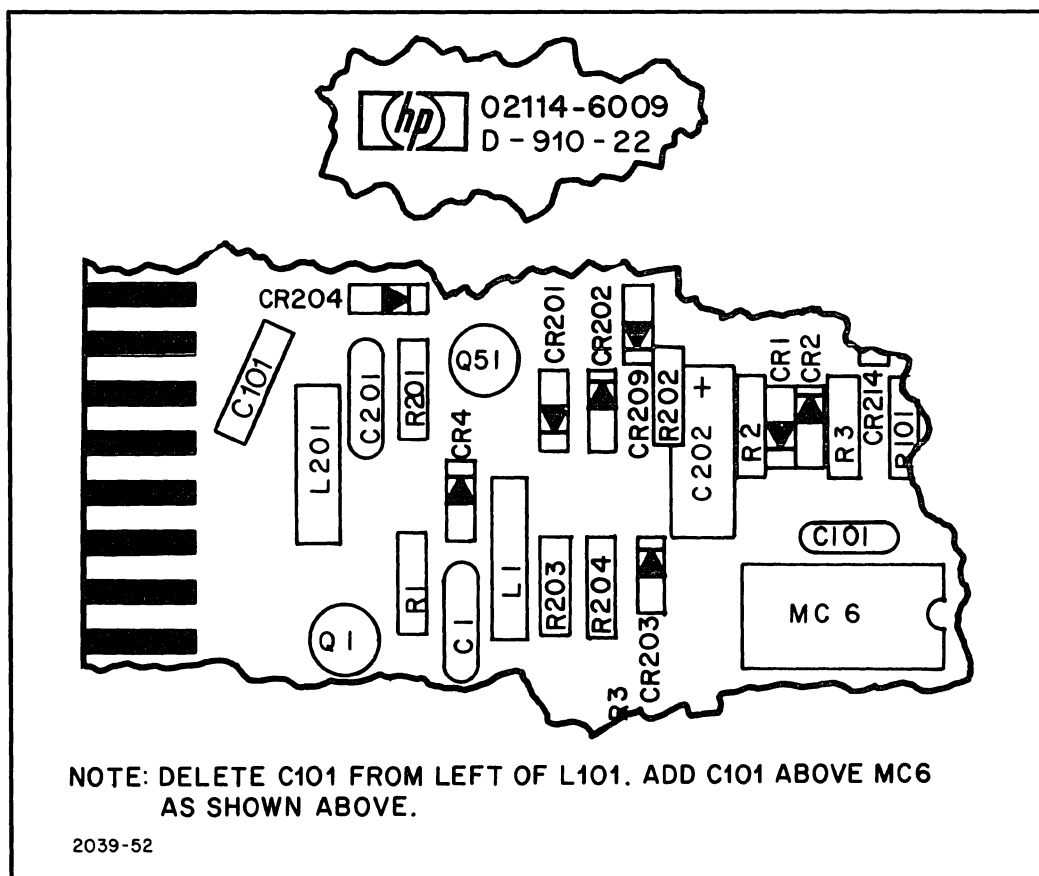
Display Board (02114-6009), Partial Parts Location Diagram Showing Changes for Board Revision D-910-22
